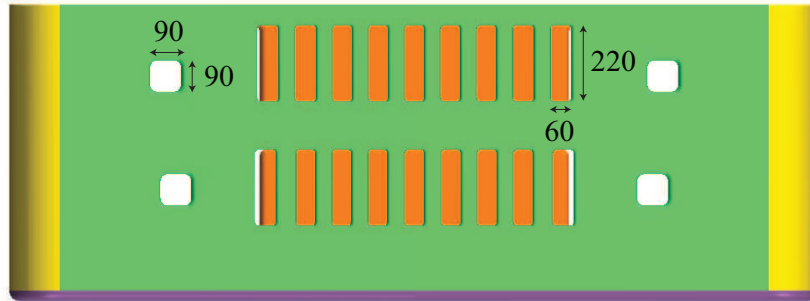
Dimensions of the holes in the simplified lower front. The dimensions are given in mm.
